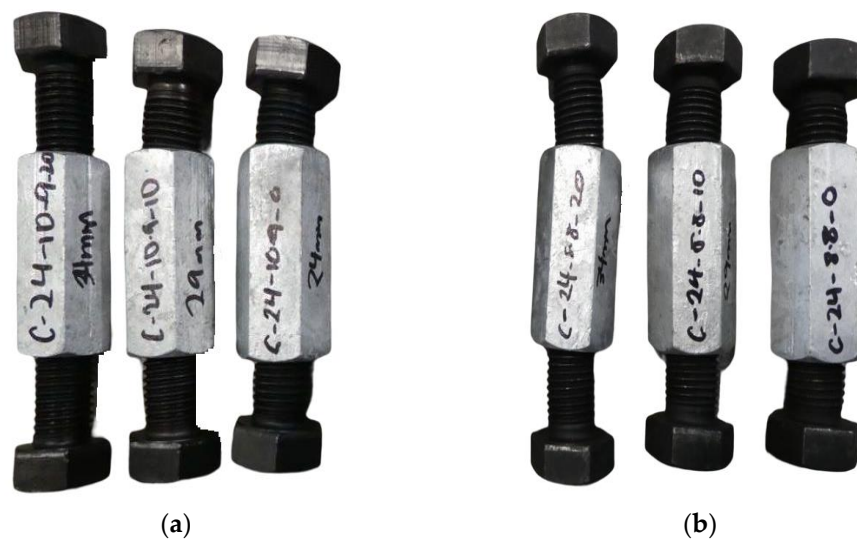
Failure modes of M24 bolts with 8.8 grade coupler. (a) M24-10.9 bolts, (b) M24-8.8 bolts.
